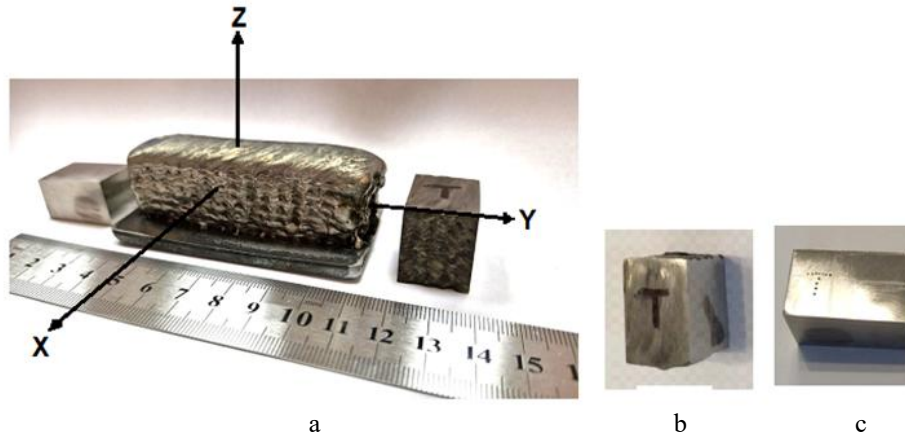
Specimen of Inconel 718 alloy fabricated via WAAM technology (a) and specimens (b, c) after mechanical post-processing. The letter T on the specimen surface indicates the top surface.
